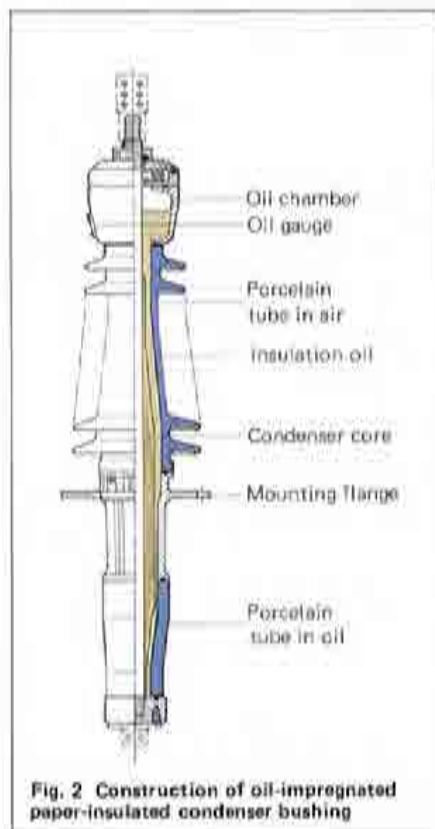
Construction of oil-impregnated paper-insulated condenser bushing
